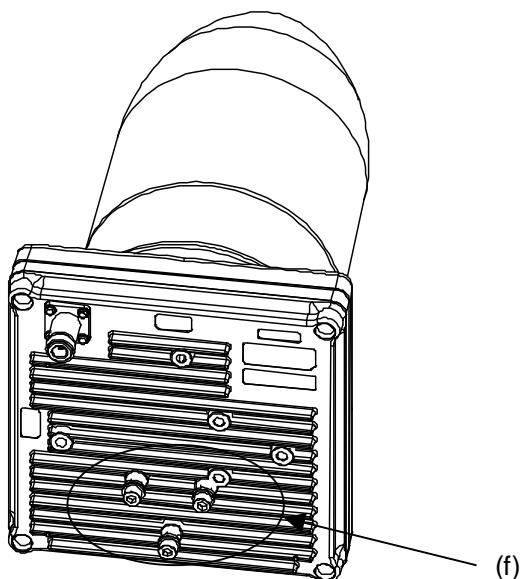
Finger-tightening the Mounting Bolts to the AP-RFU
